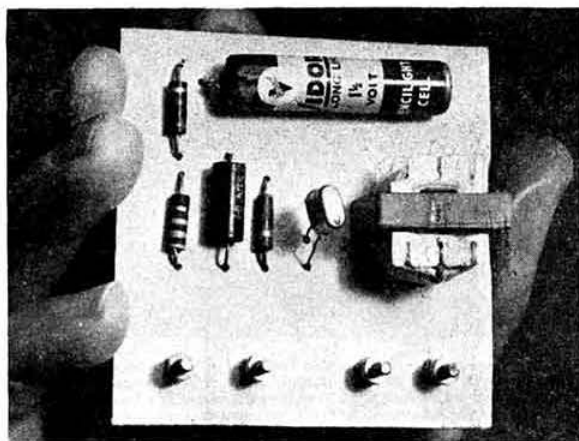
Components layout. The wiring on the reverse side of the paxolin panel can be checked against the lower diagram.
